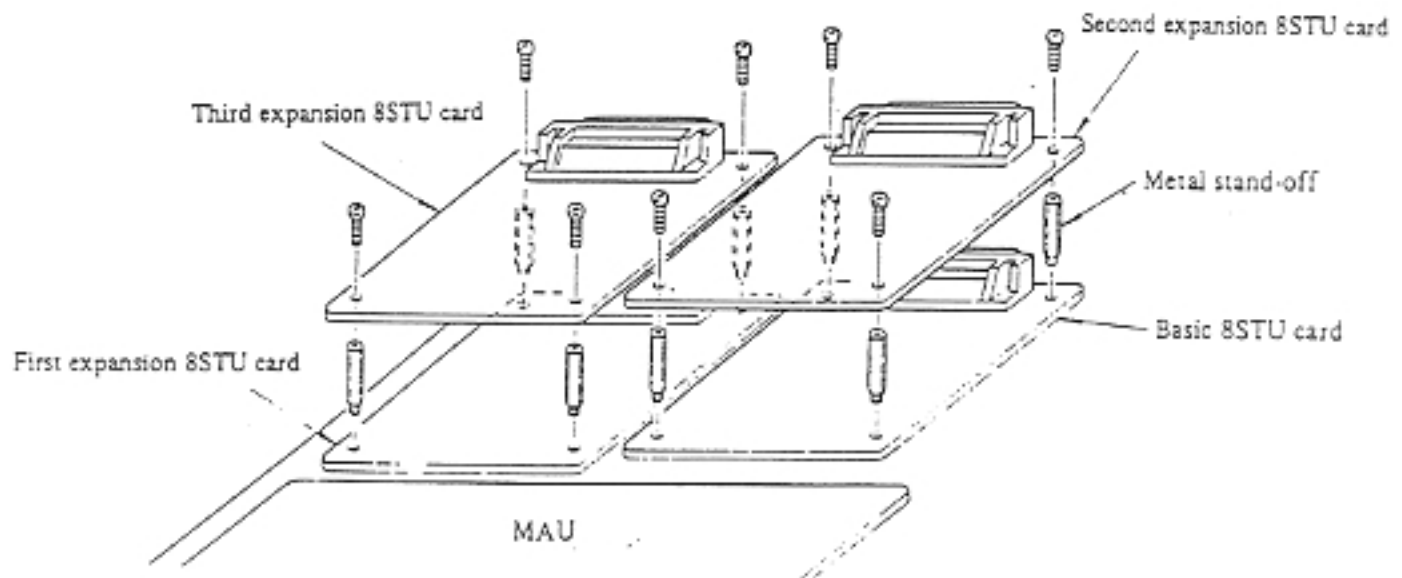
INSTALLATION OF EXPANSION 8STU CARD
